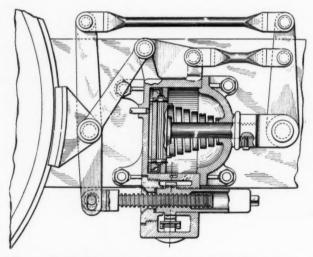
Self-adjusting railway brake mechanism is designed as compact unit, with cylinder as basis
